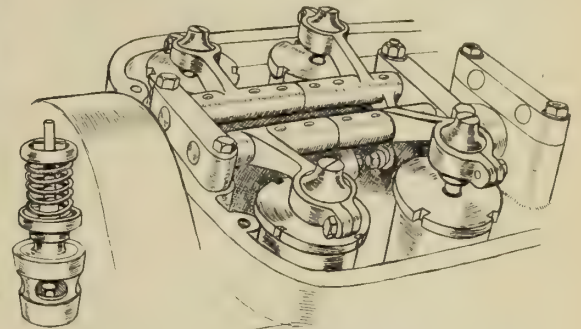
Fig. VIII. The overhead valve gear on the Germain. One valve is shown detached.
